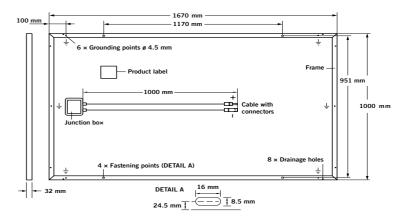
External dimensions (in mm) and components for Q.PRO-G4 (with 1170 mm fastening point distance)
